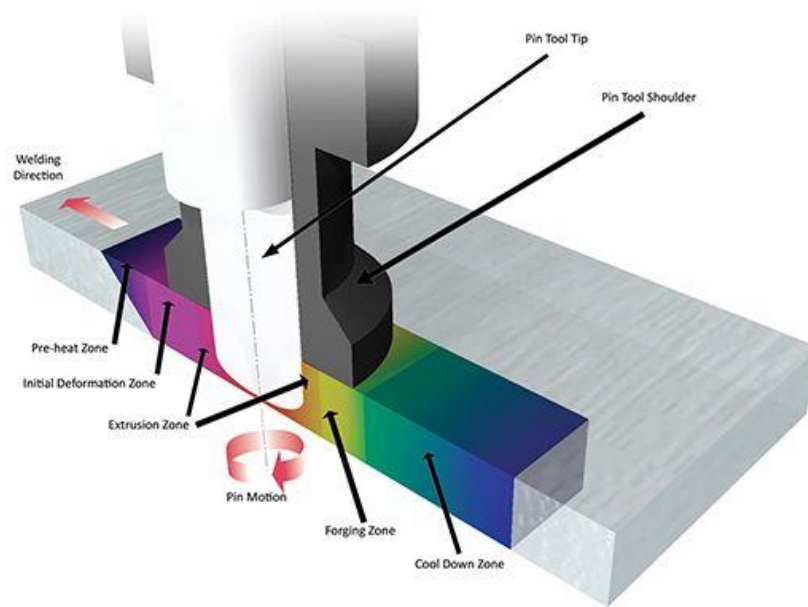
The processing zones created as the pin tool translates along the weld [36].
